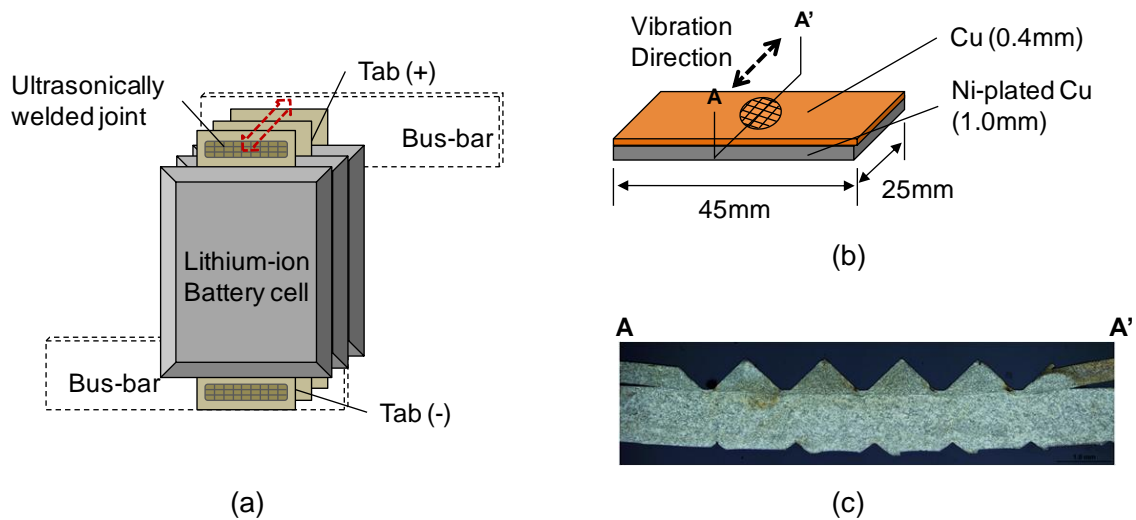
Ultrasonic welding configuration: (a) an example of battery tab joining; (b) dimension and configuration of weld coupons; and (c) cross-section image (AA')
